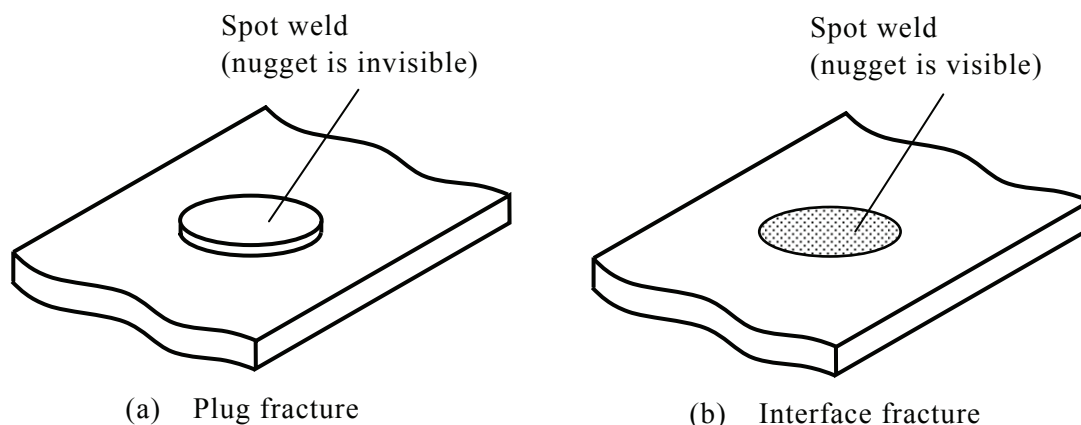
Schematic illustration of fracture modes in test of spot welded joint.
